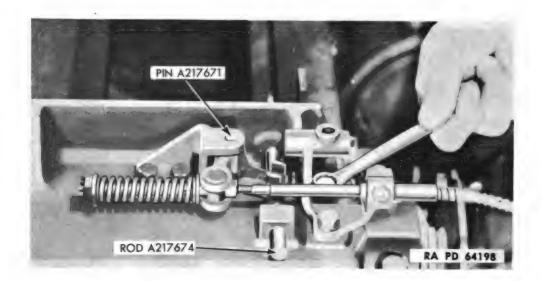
Removing Foot Firing Mechanism Cable from Cradle
